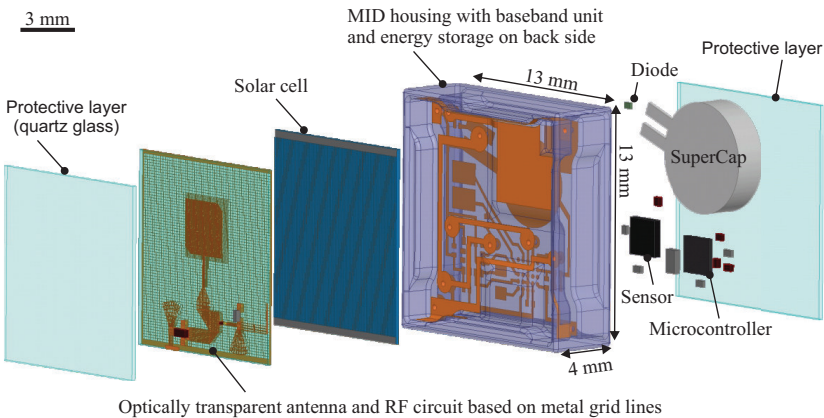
Exploded view of the developed self-sufficient RFID sensor tag.
